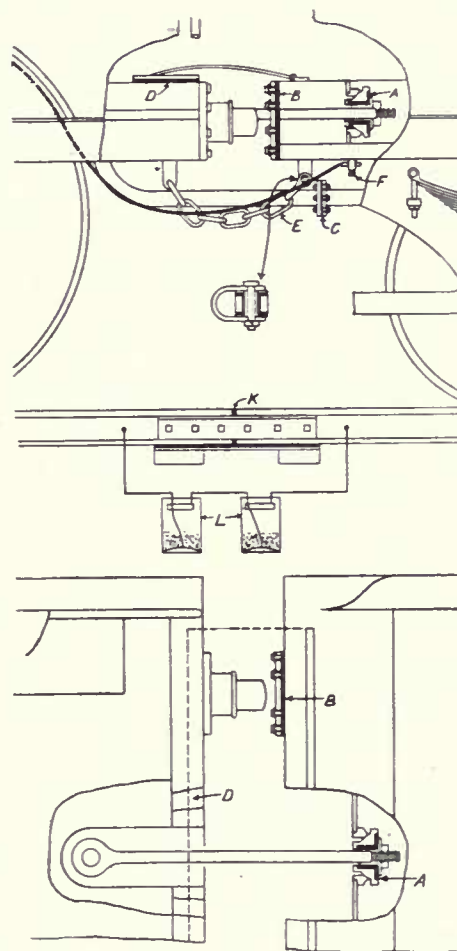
Insulation of Engine, Miller Cab Signal.
